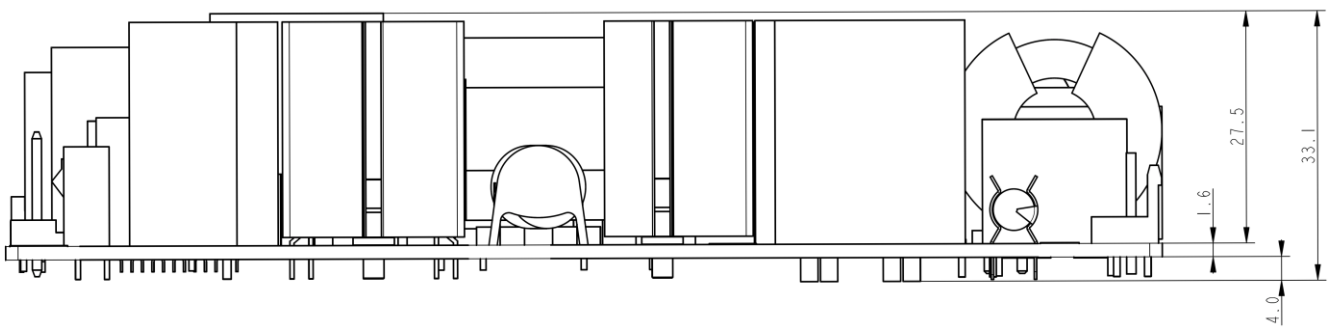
ICEpower400SM Side-view. Dimensions in mm.
